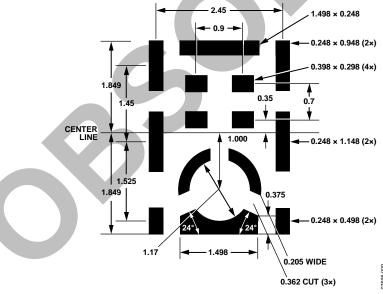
Suggested Solder Paste Stencil Pattern Layout
